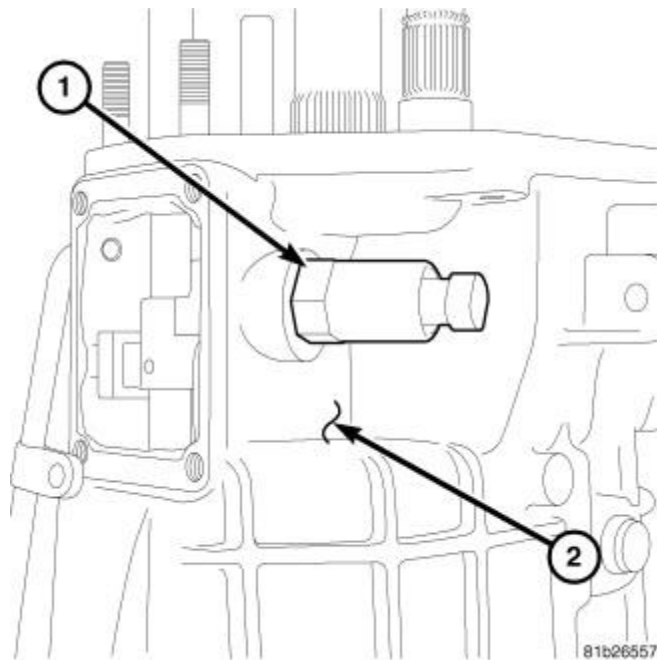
Skip Shift Solenoid & Left Side Of Case
